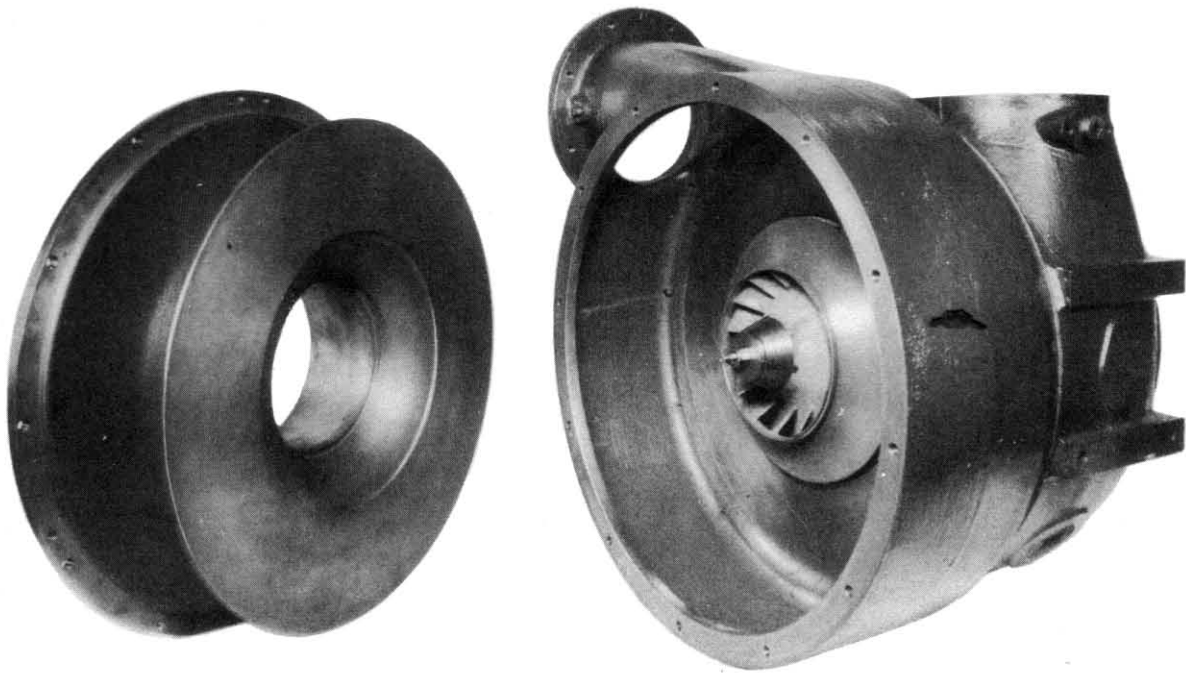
Partially Dismantled View Showing Blower Inlet Removed for Cleaning.
